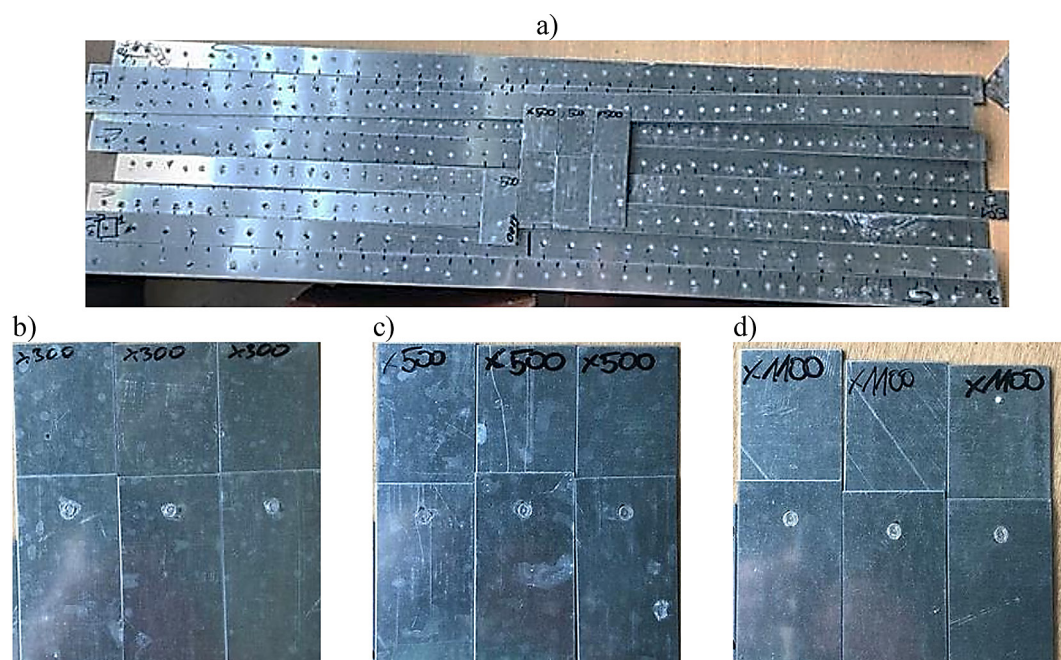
Macroscopic images of the sheet metal strips used in the study, illustrating the number of spot welds performed: (a) view of the initial 500 spot welds, with samples extracted for testing after: (b) 300 welds, (c) 500 welds, and (d) 1100 welds
